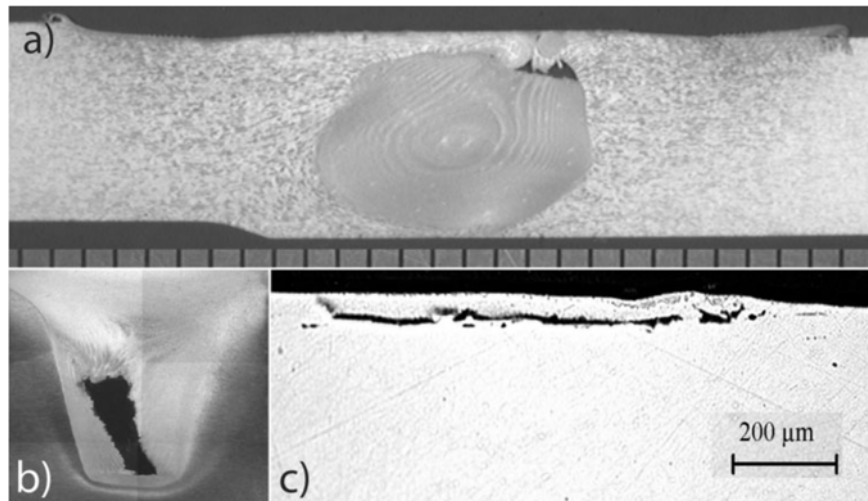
27 Characteristic void flaws in friction stir welds [109]:
